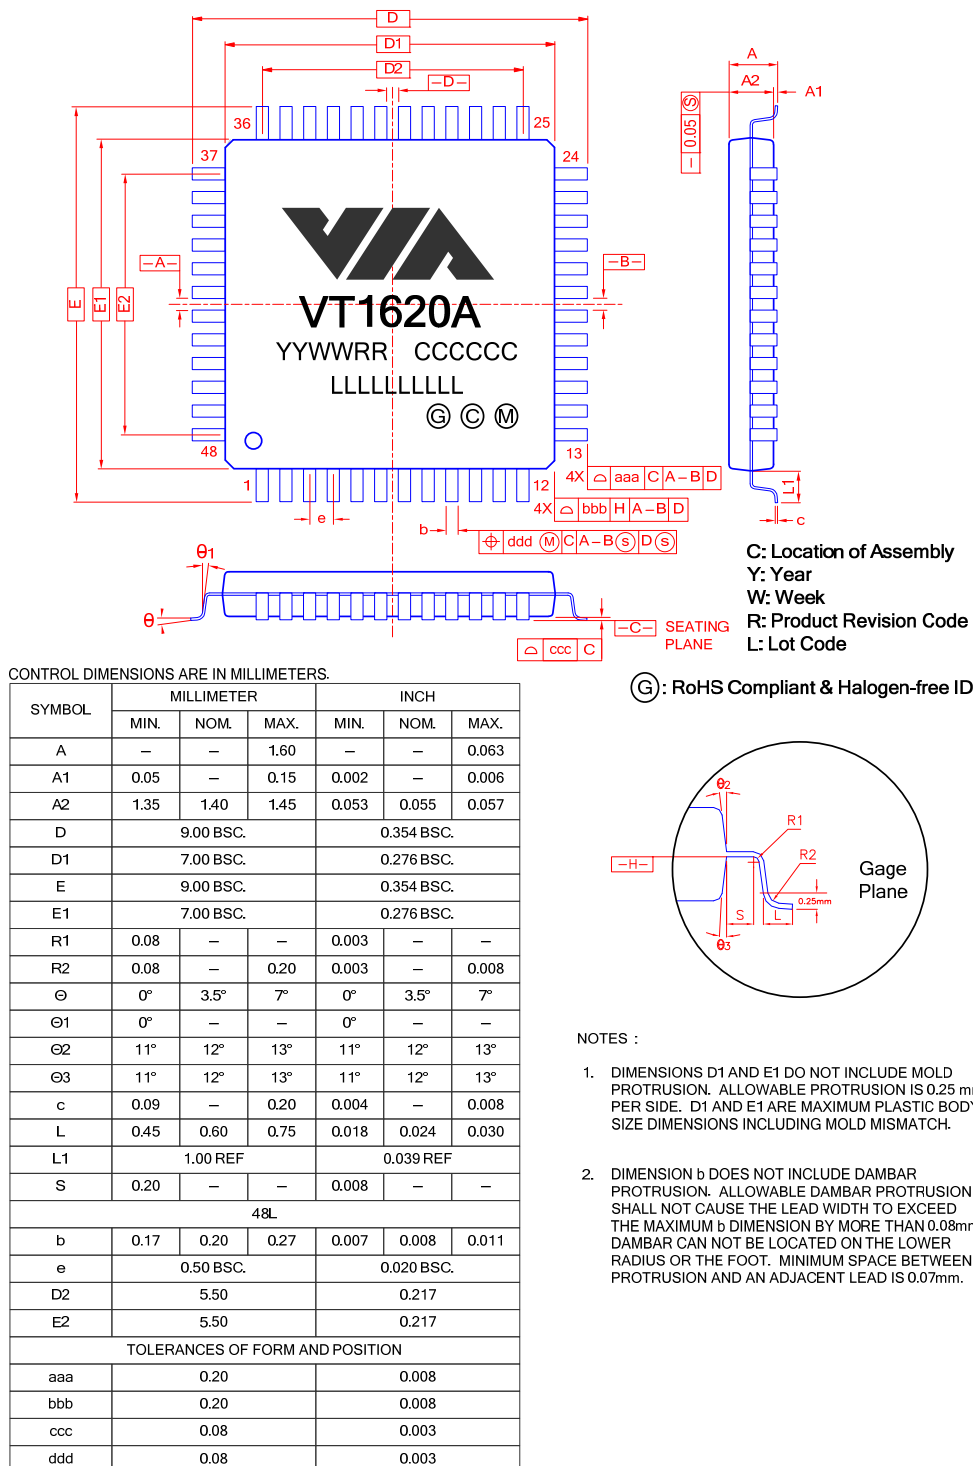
VT1620A LQFP-48 Package (7 mm×7 mm)
